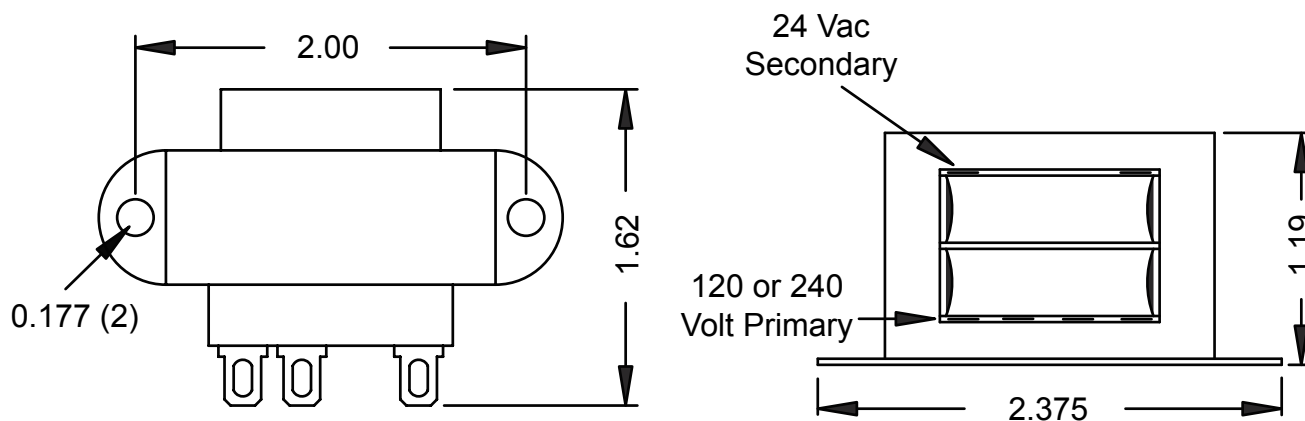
Mounting dimensions of 10 - 40 Amp model 1032A.
